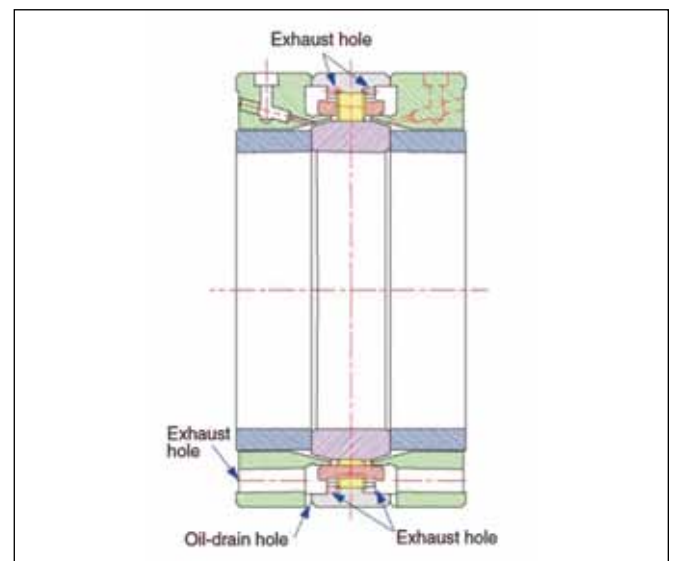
Oil-drain/hole-structure, NU-type cylindrical roller bearing.
